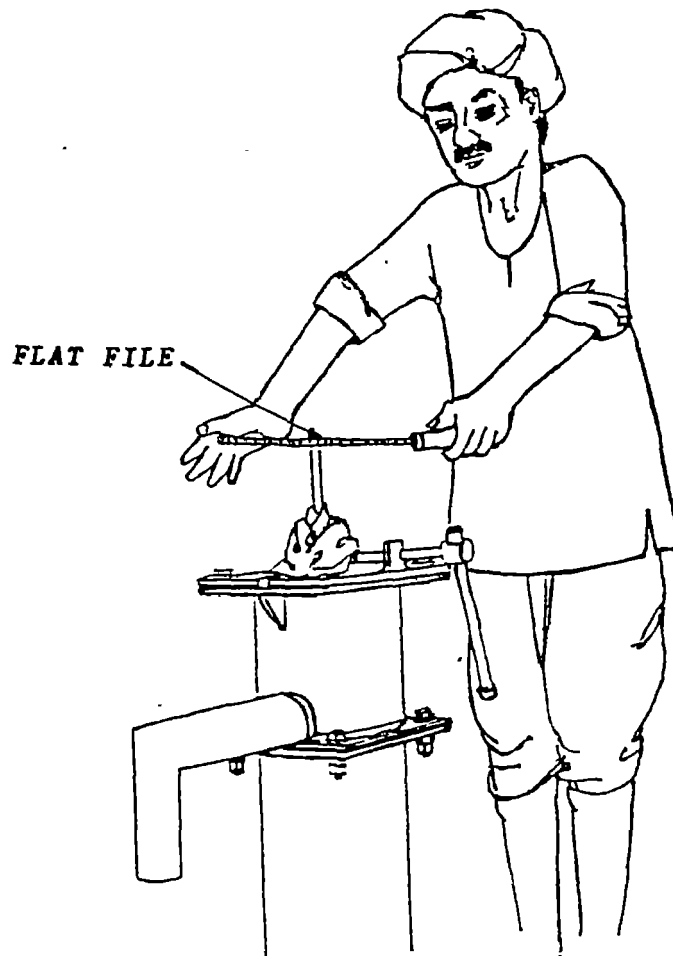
SMOOTHEN THE CUT SURFACE OF CONNECTING ROD.
